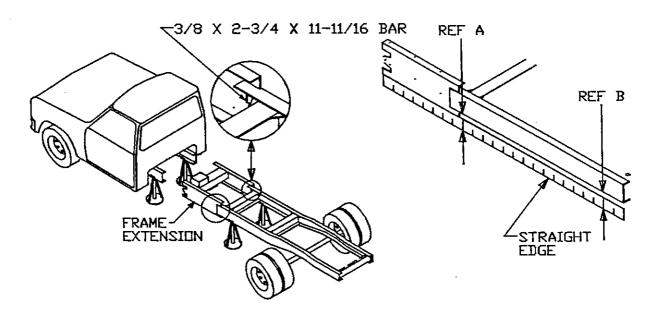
WELDING FRAME EXTENSION TO REAR FRAME
